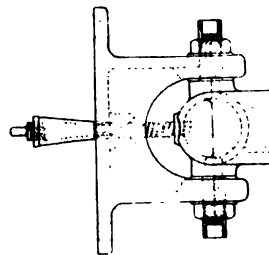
Clutch throw-out yoke assembly showing how two bearings and two clutch throw-out rollers are lubricated from one reservoir with one point of filling
